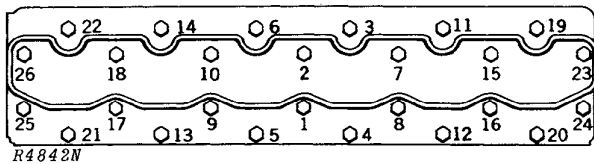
Cylinder Head Cap Screw Tightening Sequence
